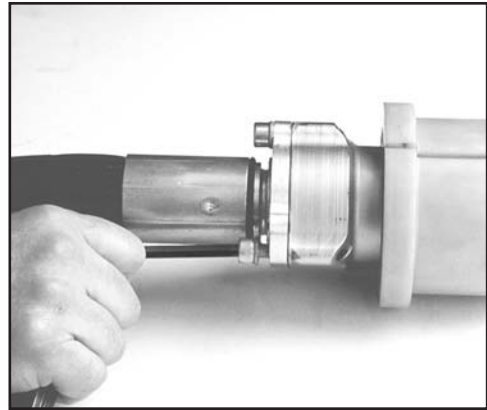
TIGHTEN 3 SOCKET HEAD CAP SCREWS
